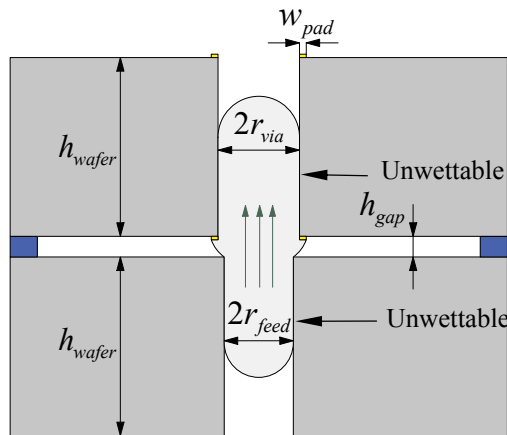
Illustration of the geometrical parameters and working principle of a vertical solder pump. A difference in feed hole and via hole diameters leads to a pressure differential in the molten solder and solder pump action.
